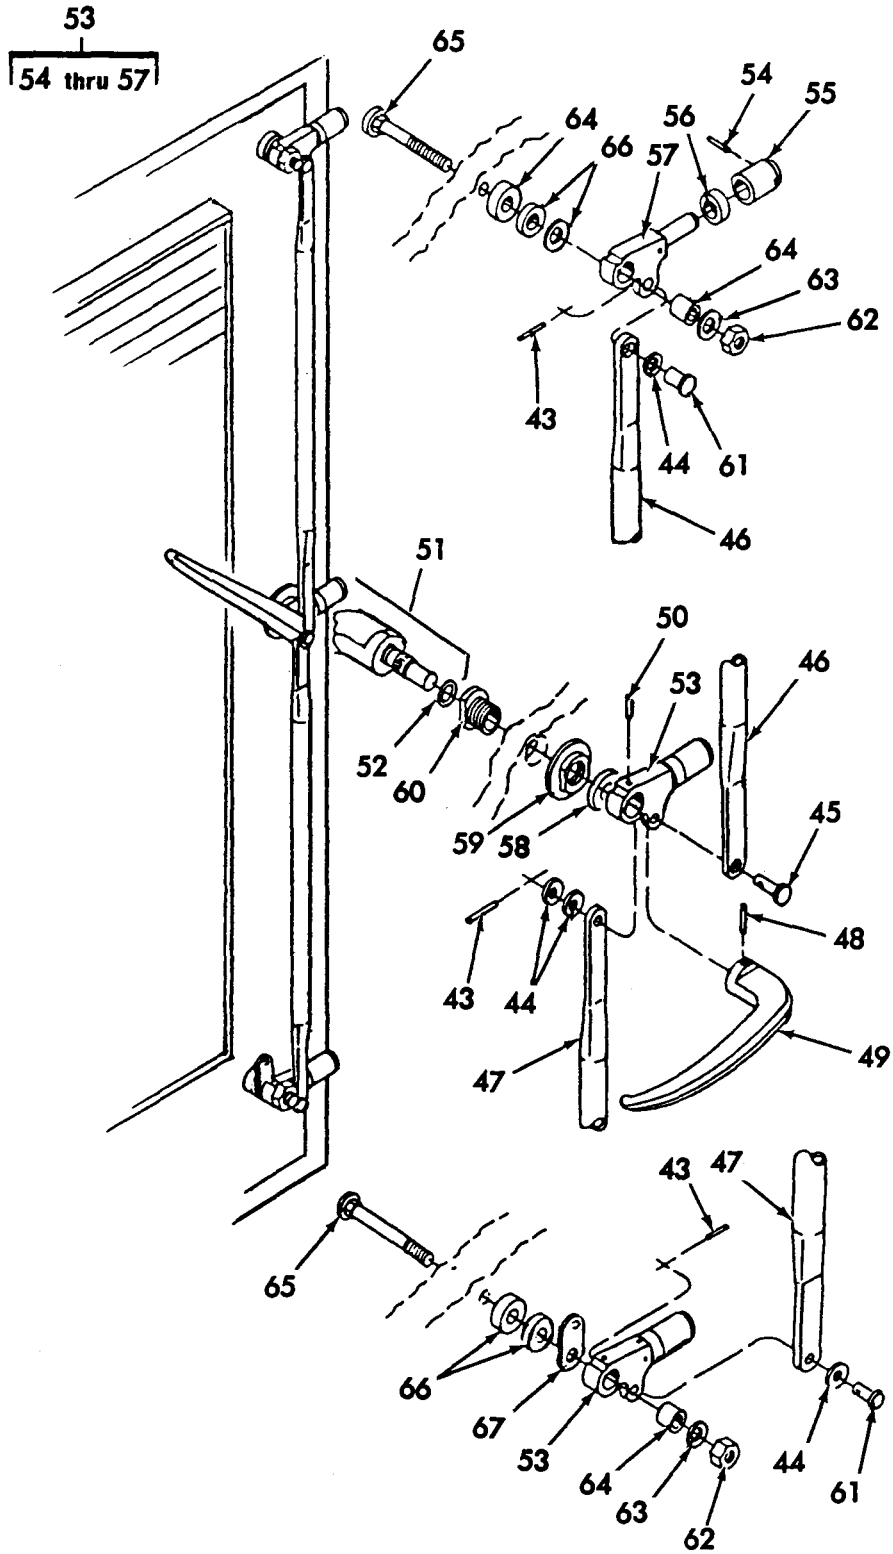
Inner Door Assembly (Sheet 3 of 4)
